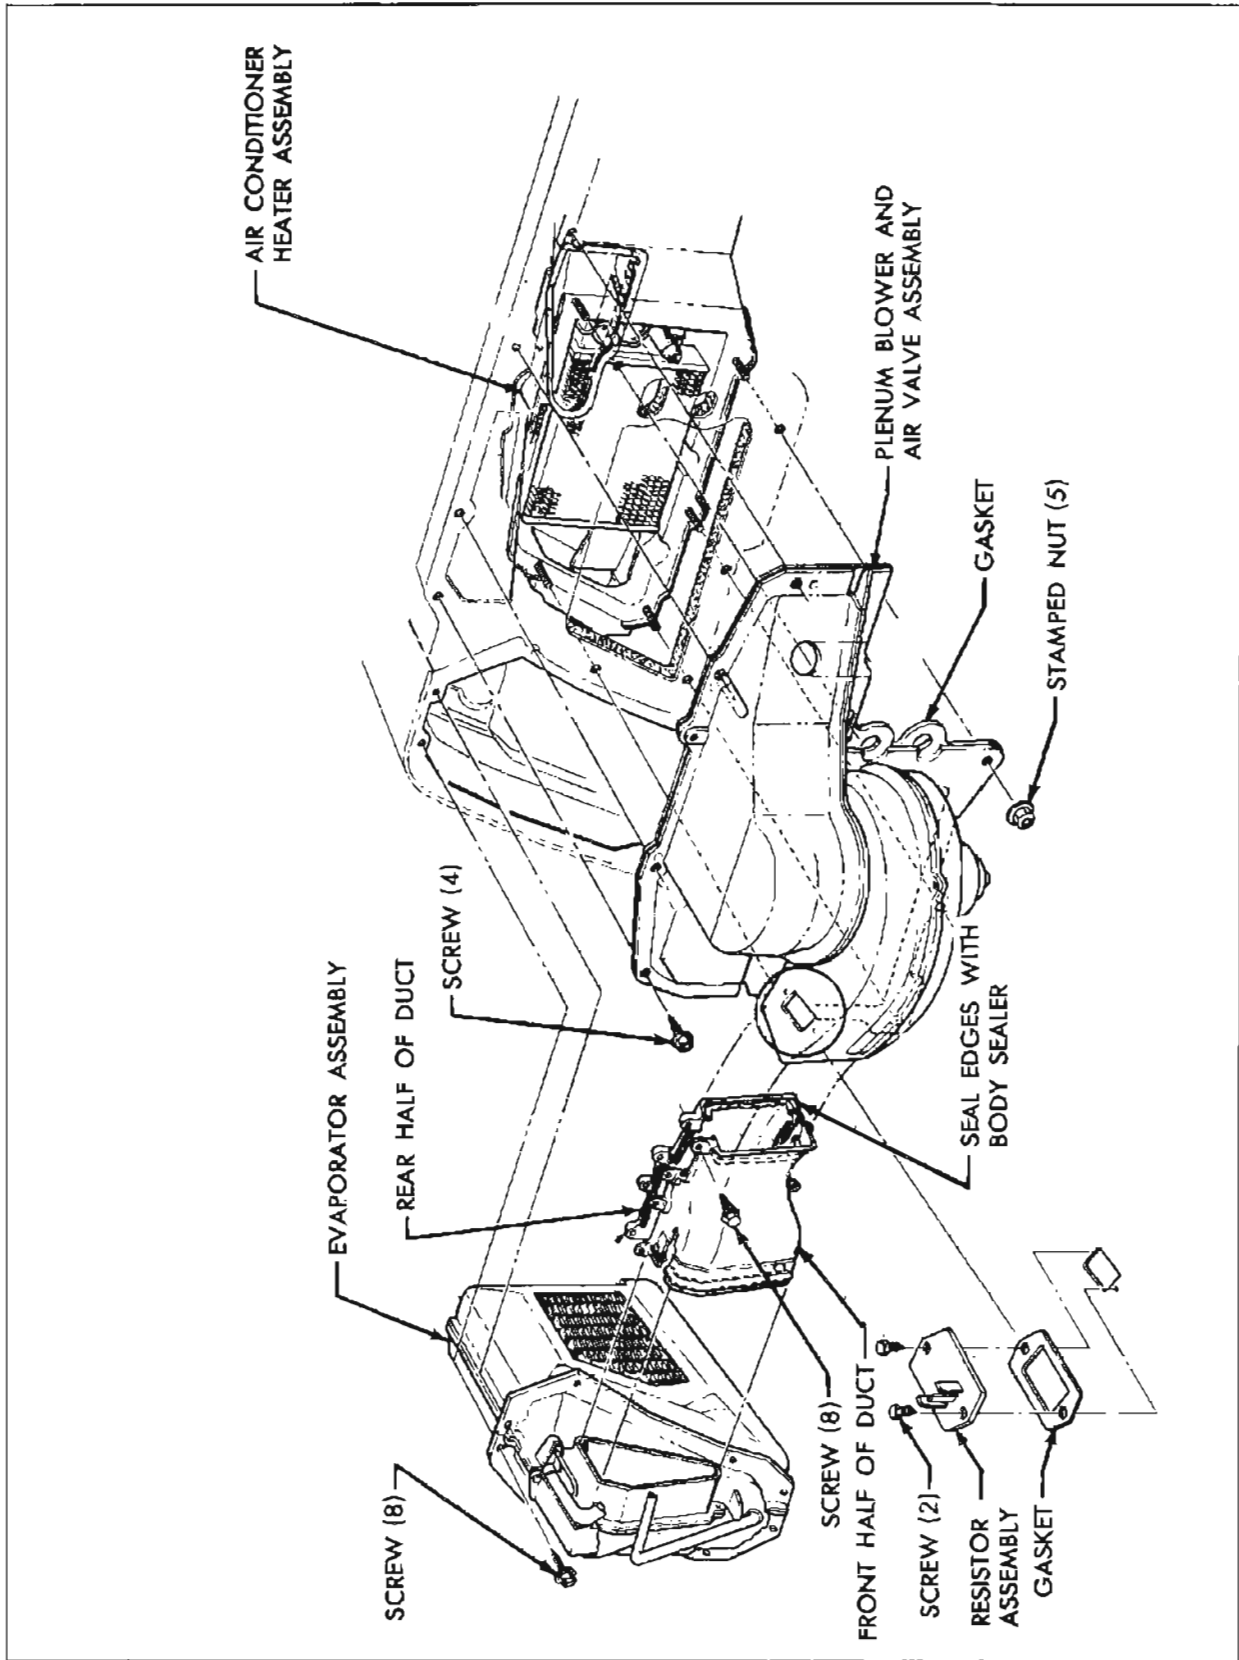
Evaporator Assembly, and Plenum Blower and Air Valve Assembly Installation
